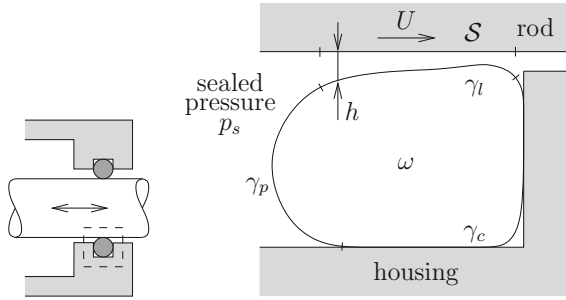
Reciprocating O-ring seal: schematic of the problem
